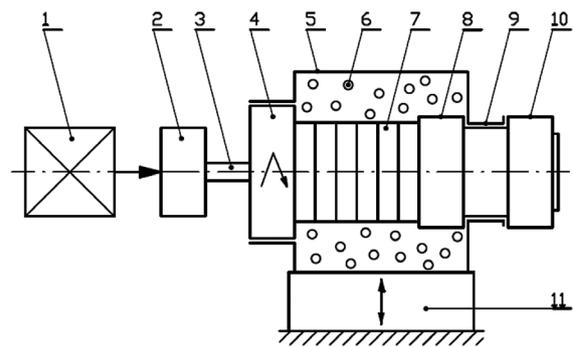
Schematic illustration of the stand for vibratory and rotational shot peening: 1 – electric motor, 2 – reduction gear, 3 – flexible coupling, 4 – spindle, 5 – working chamber, 6 – bead, 7 – sample, 8, 10 – special nuts, 9 – slide bearing, 11 – vibrator
